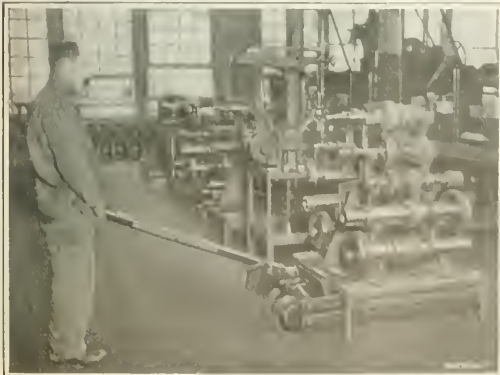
Rack which holds Assembled Shafts for Two Complete Headstocks
